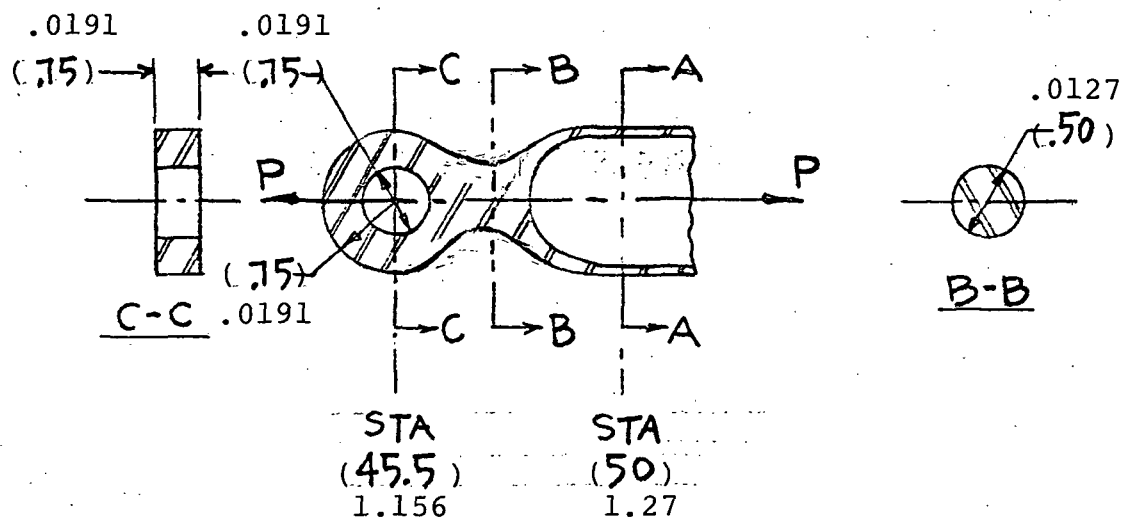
Sketch of Root End Metal Liner Head Cross-Section
